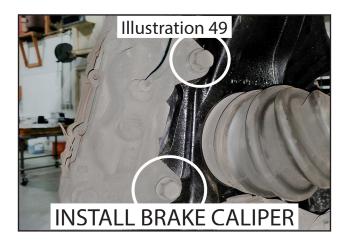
Install the brake rotor and the brake caliper using the factory hardware and supplied thread locker. (80) [Illustration 50] Attach the brake line brackets to the knuckle using the factory hardware.
